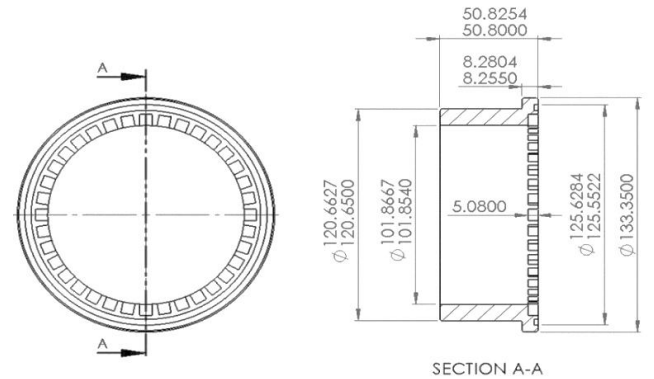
Detailed drawing of new clearance seal with swirl brakes. All dimensions are in mm
